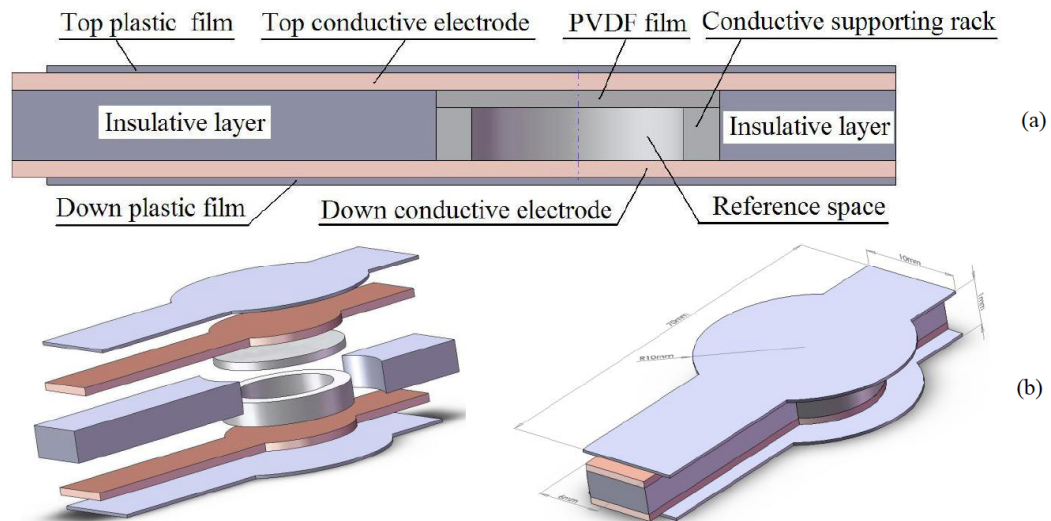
Structure design of single-point force sensor. (a) Full section drawing on the given sensor (scale: 2:1); (b) 3D explosion drawing and assembly drawing on the given sensor (scale: 1:1); note: the dimensions of displaying sensor is 70 mm × 20 mm × 1 mm.
